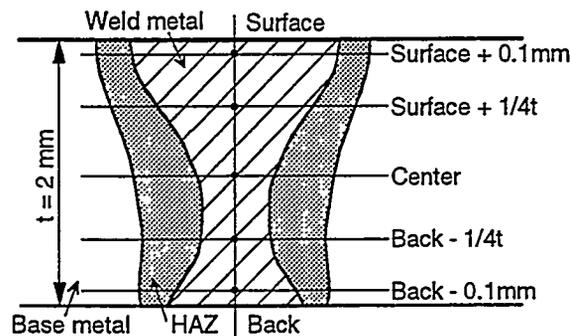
The locations of the hardness measurement of the laser weld joint
